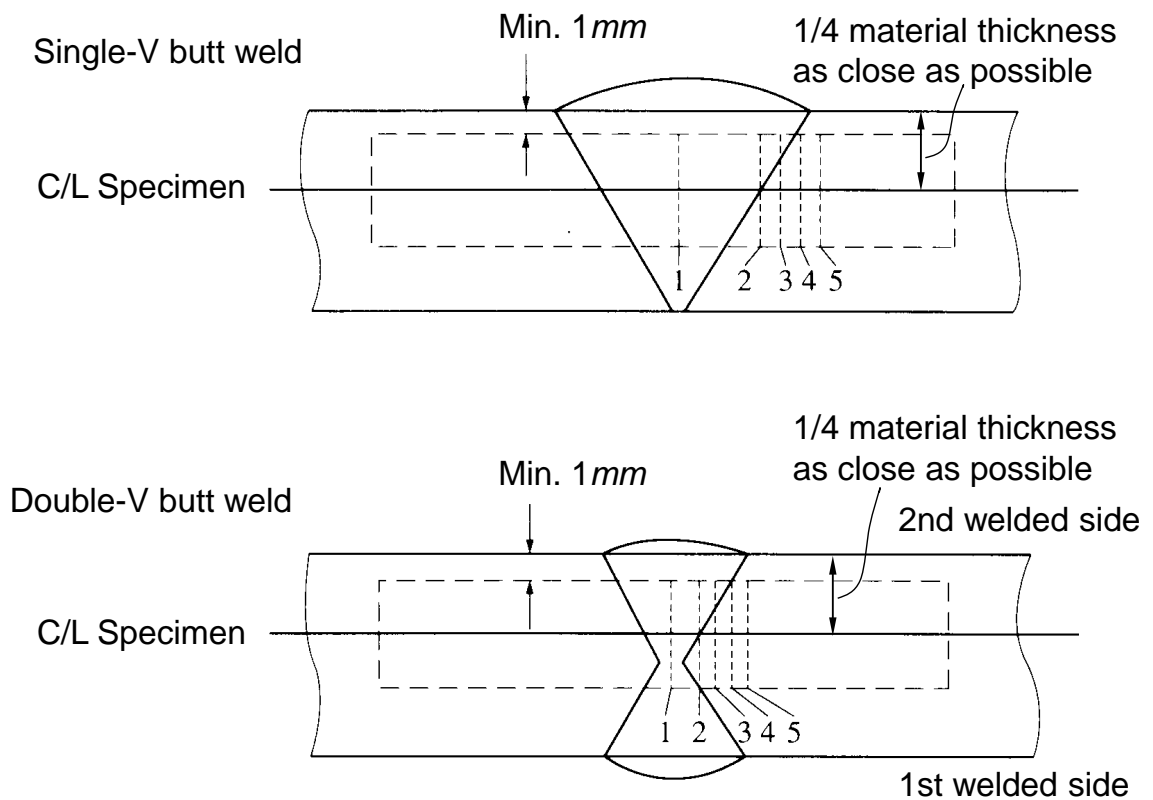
Sampling position of Charpy V-notch impact test specimens (Weld)
